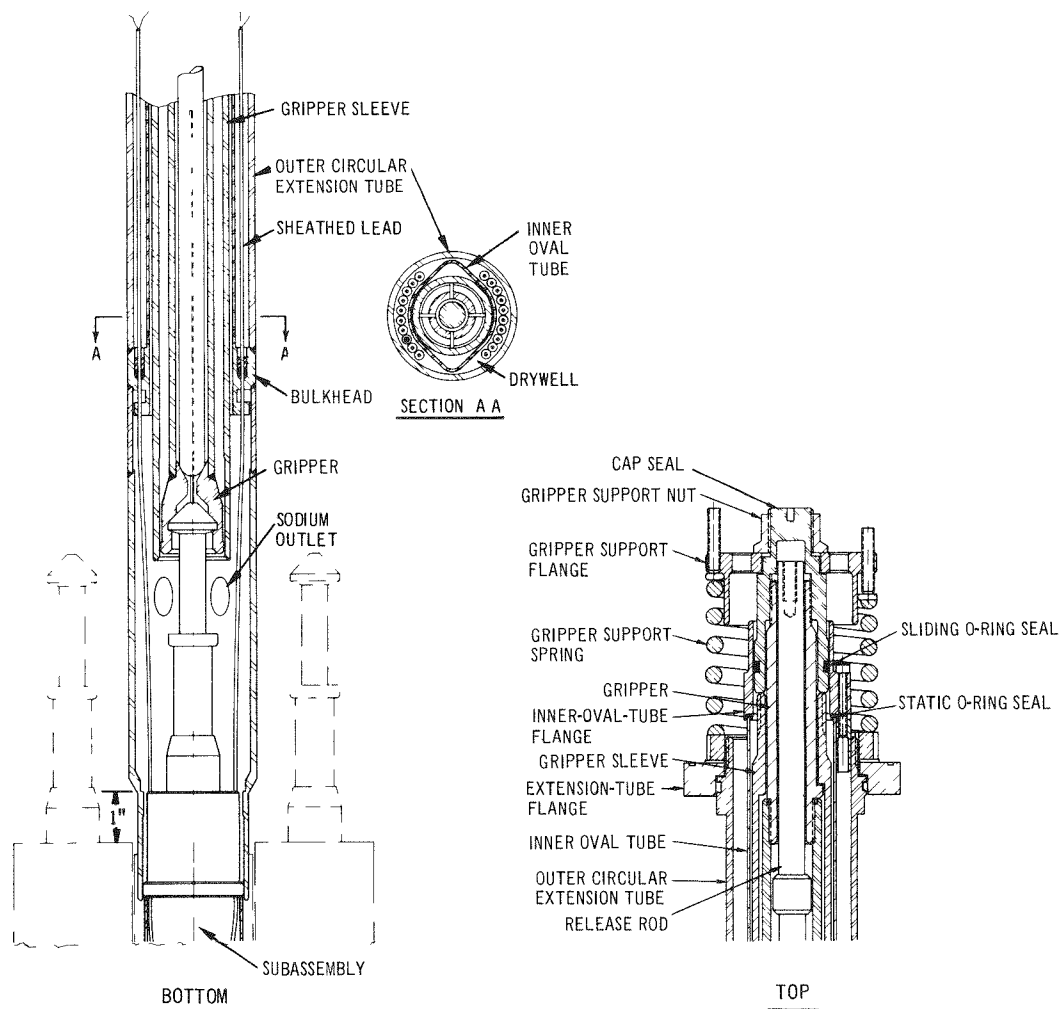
Extension Tube of Instrumented Subassembly XX08
